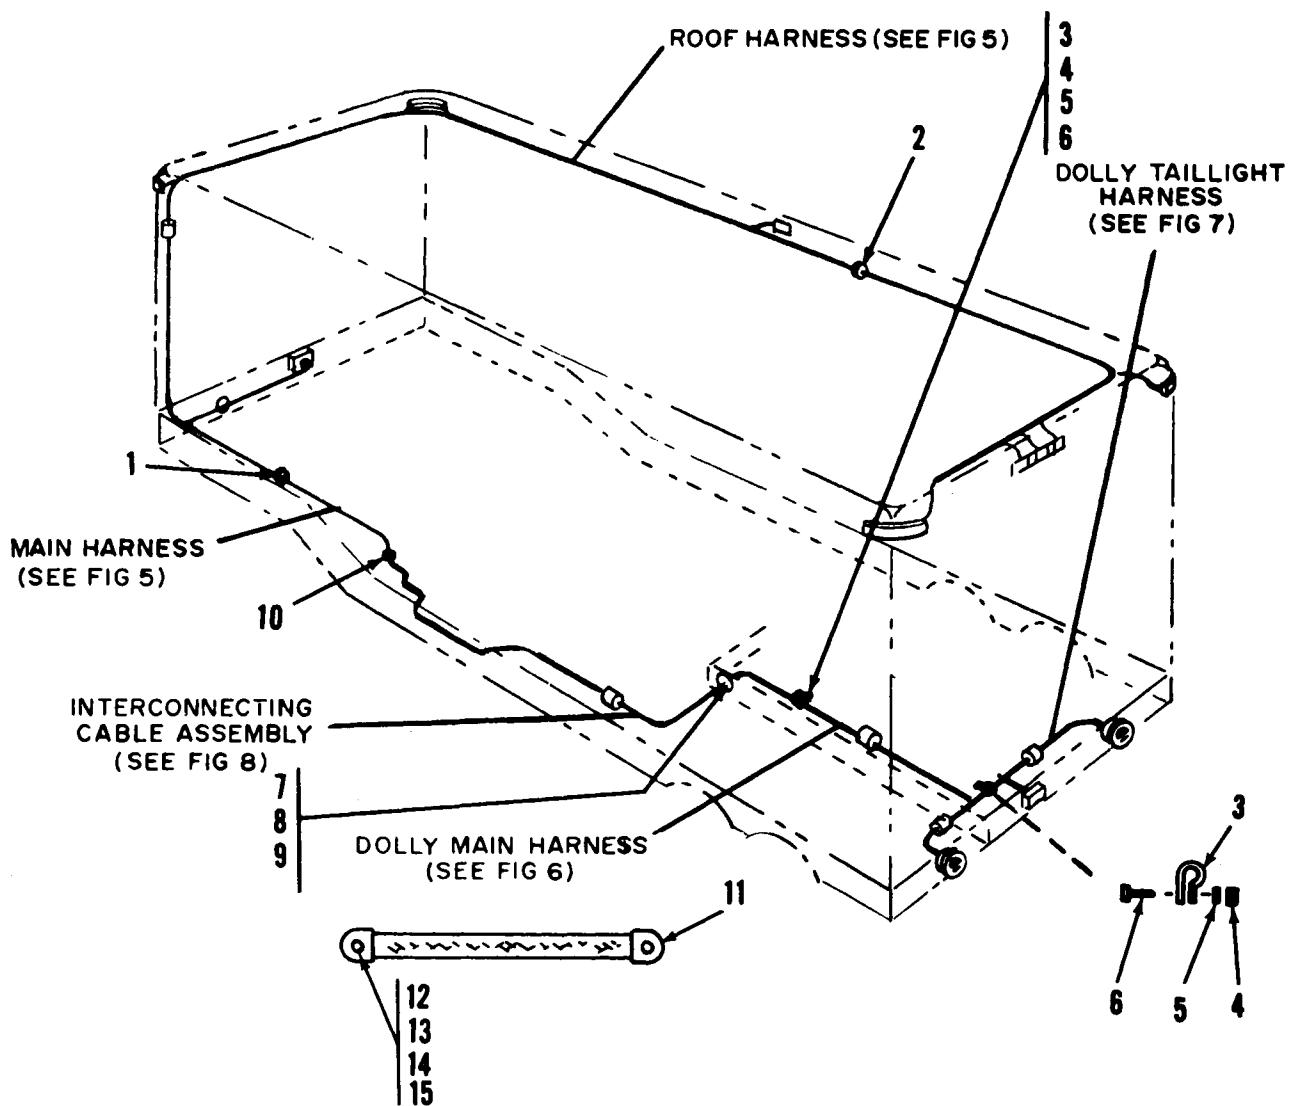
Wiring Harness Attaching Parts, XM991, XM995.
